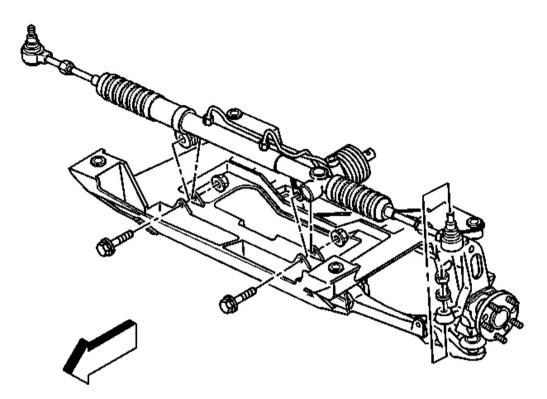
Power Steering Gear & Mounting Bolts Courtesy of GENERAL MOTORS CORP.
